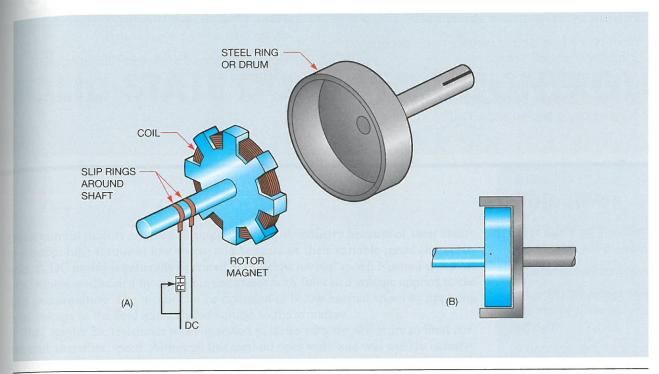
Diagram A shows magnetic armature or rotor and drum. Diagram B shows rotor mounted inside the drum. The rotor is the input shaft of the clutch and the drum is the output shaft.
